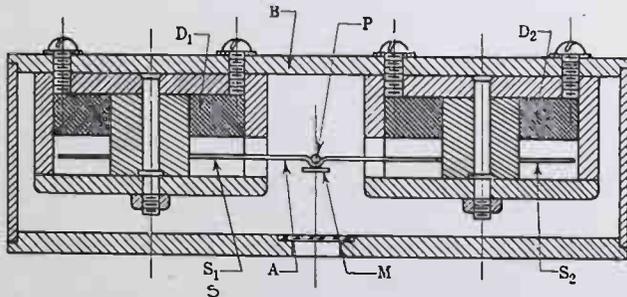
SECTIONAL VIEW OF DIFFERENTIAL A-C. GALVANOMETER
